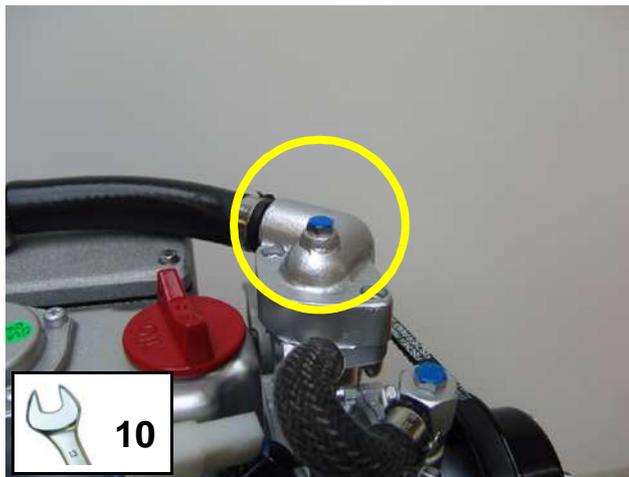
Ventilation screw -thermostat housing
